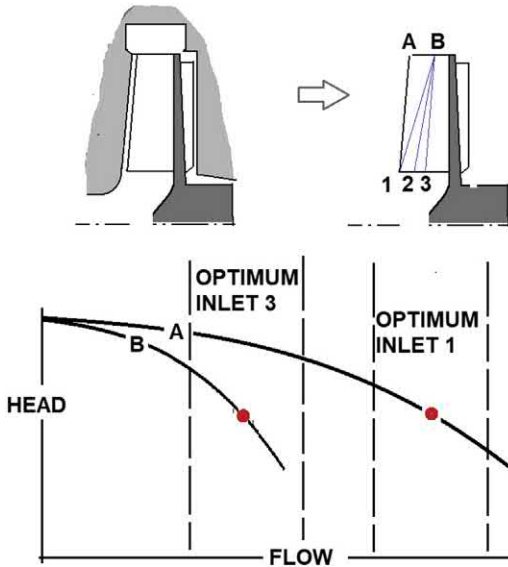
If this semi-open impeller is machined to follow line B1, the outlet flow will shift to a lower flow but the optimum inlet flow and NPSHR curve will be essentially unchanged. However, by machining instead to Line B3, the optimum inlet can be shifted in step with the outlet. Machining to B2 will achieve a partial shift. It is more difficult to accomplish this simultaneous shift when modifying shrouded impellers.
